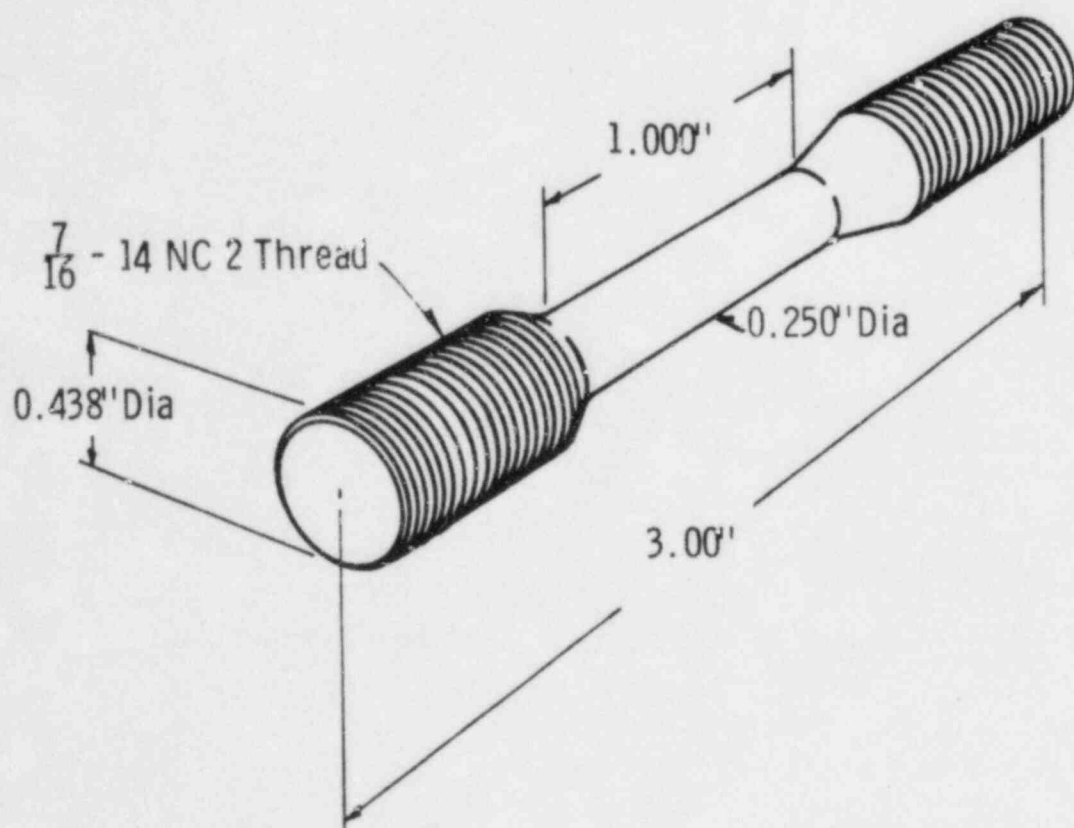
TYPICAL TENSILE SPECIMEN
